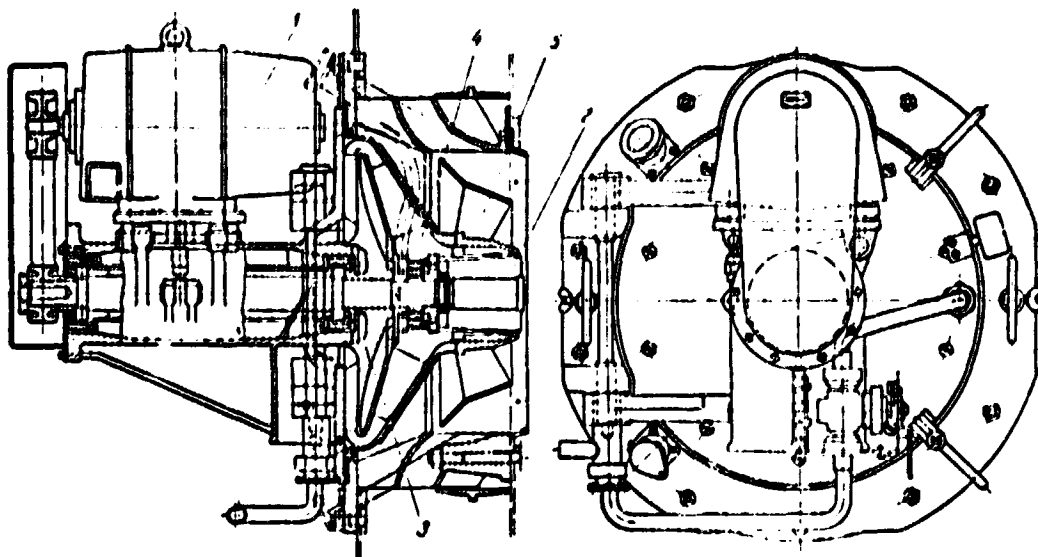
Rotary spray nozzle with supply of secondary air via burner.
